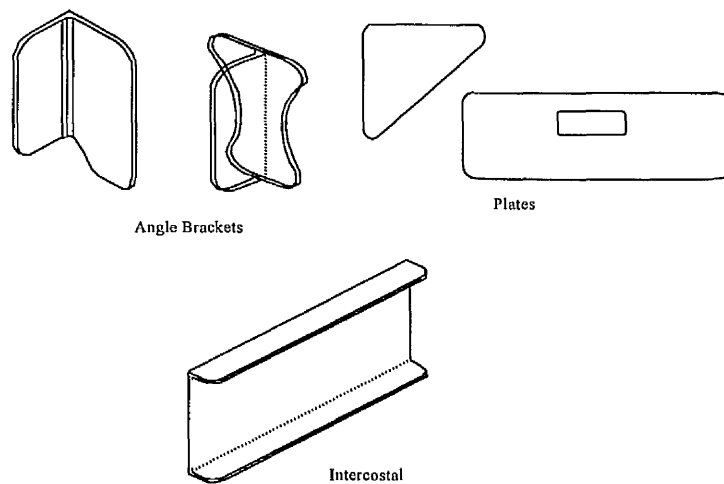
Typical Items Which Make Up Underfloor Support Structure
